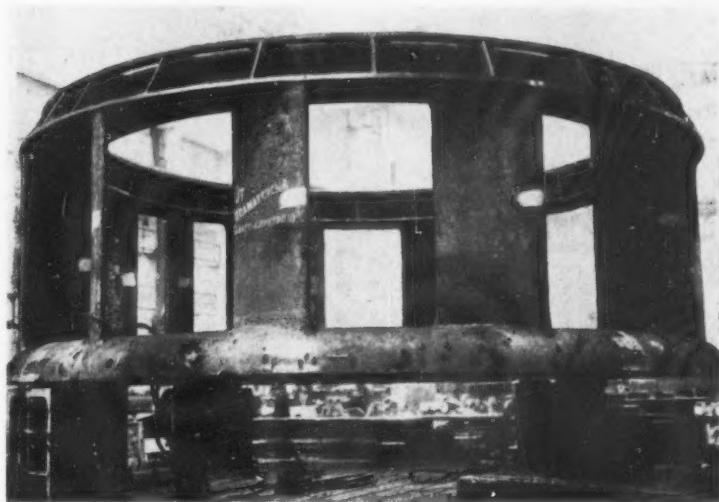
Close-up view of one end of the Sverdlov machine during turning operations on the shaft of a large water turbine guide vane
